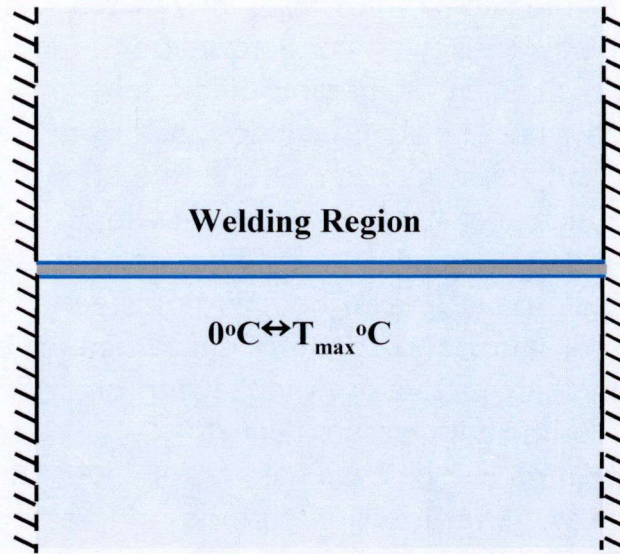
Mechanical constraint along the welding line.
